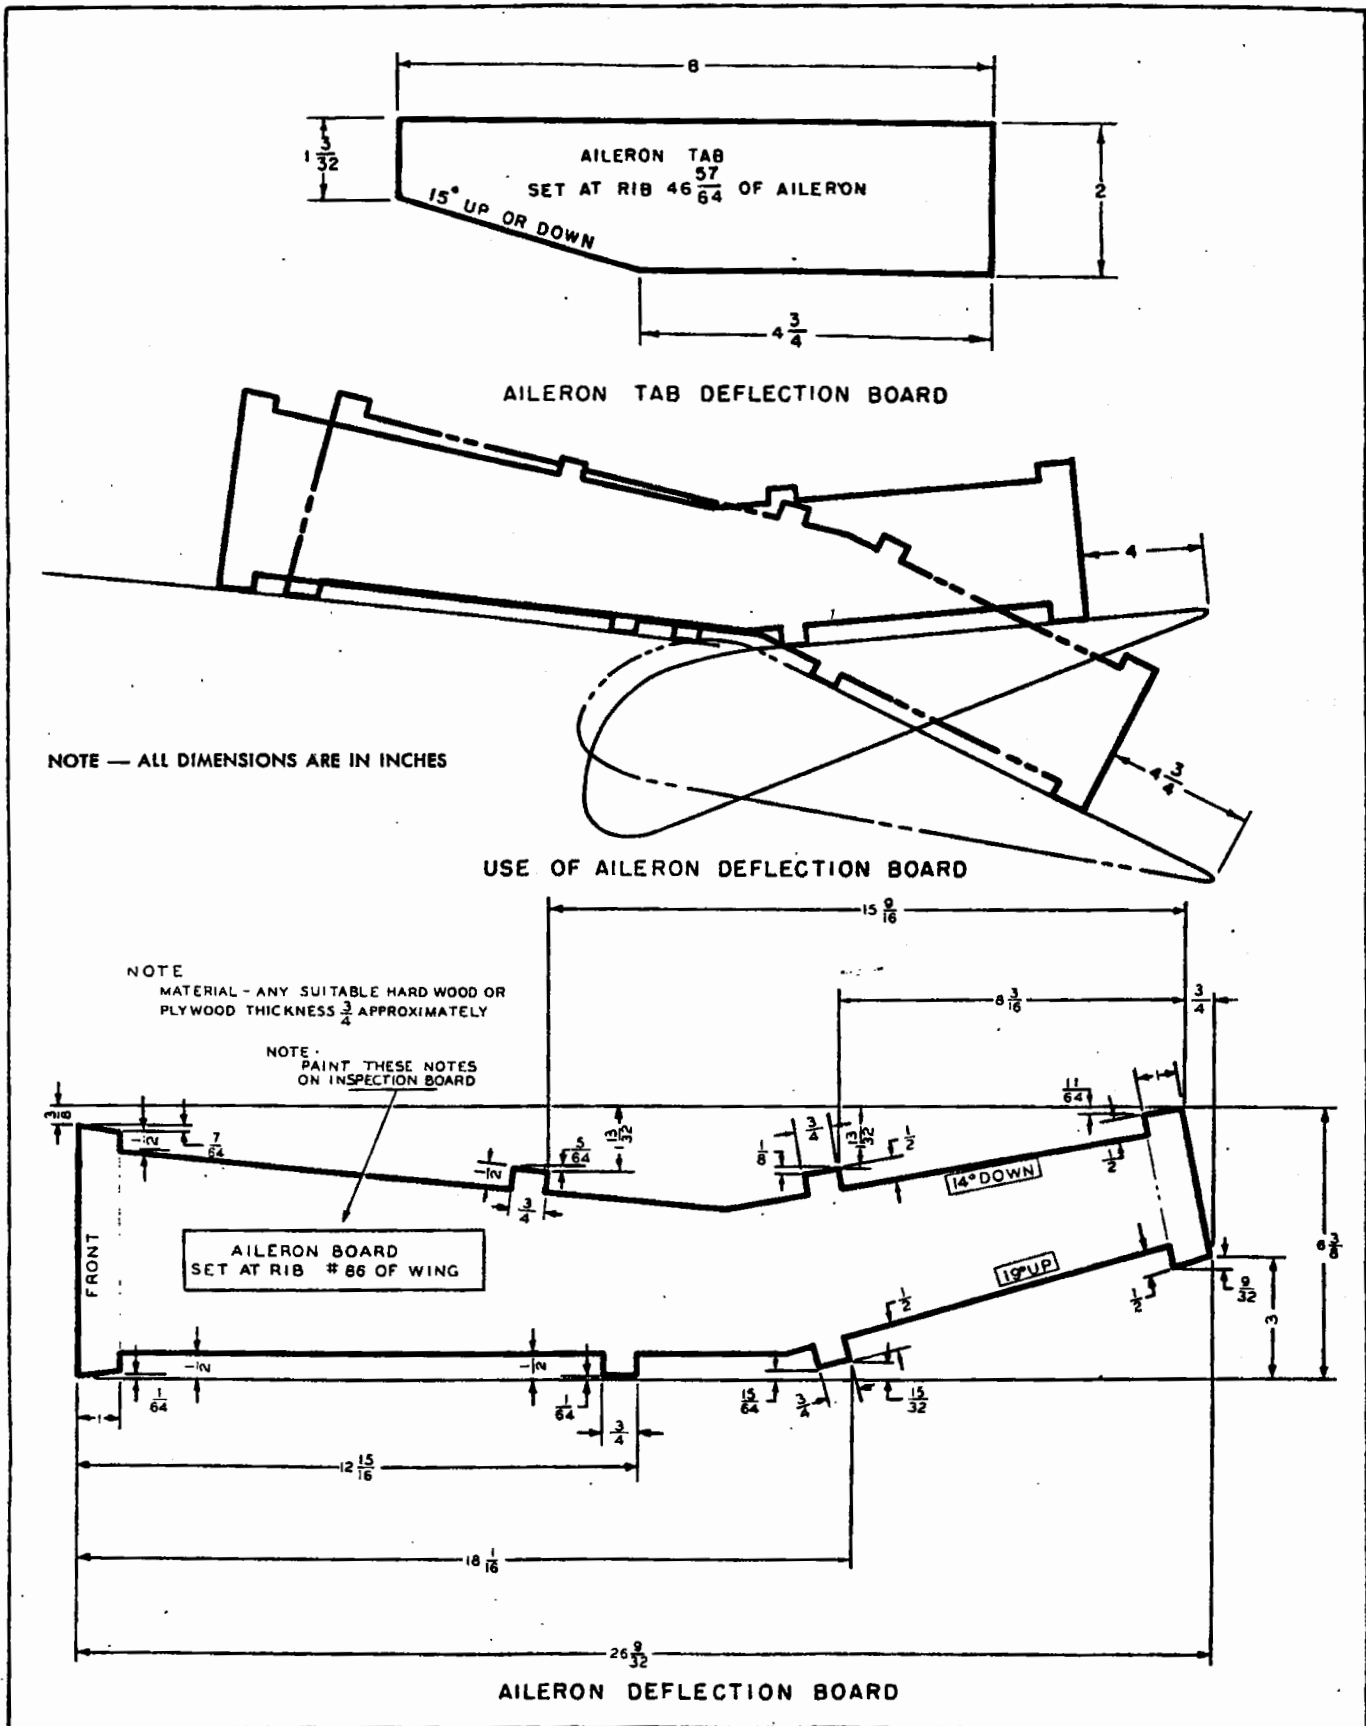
Aileron and Aileron Tab Travel Checking Boards.
